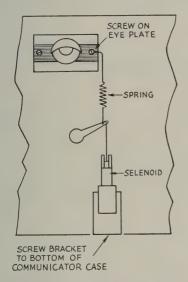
Sketch showing details of Communicator I and II push-to-talk feature.
